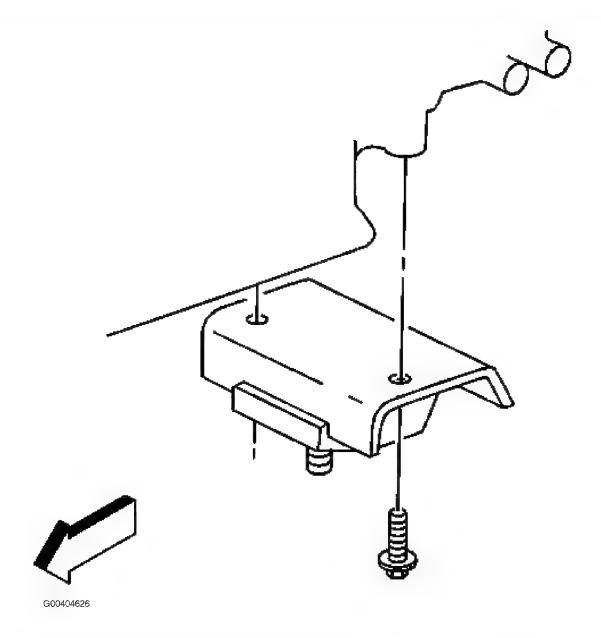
Removing/Installing Rear Mount-To-Transmission Bolts Courtesy of GENERAL MOTORS CORP.
